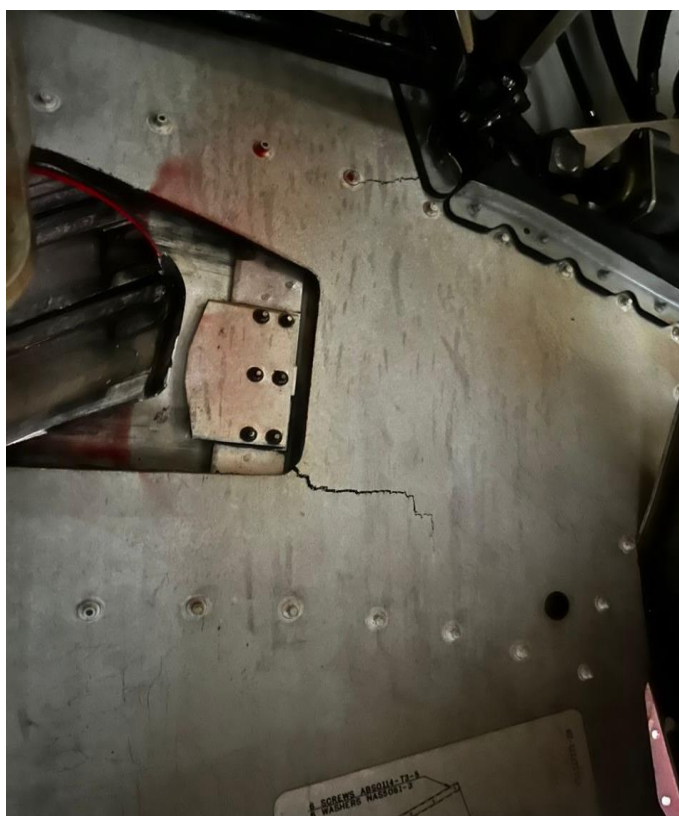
Aft sliding panel compress panel assembly. Evidence of crack found
